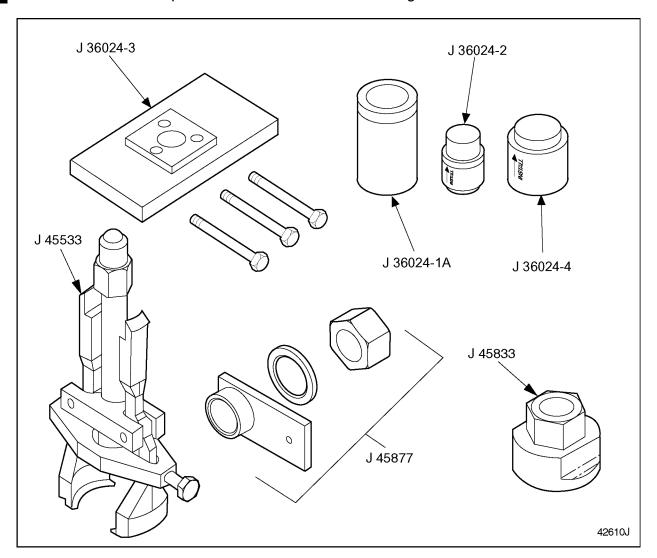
Accessory Drive Service Tool Set J 36024–D
